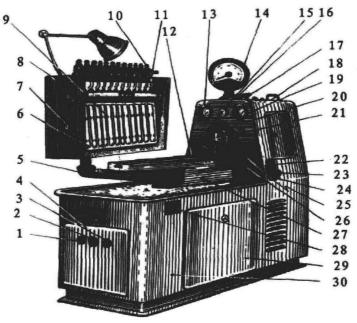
12PSD55 Injection Pump Test-bed External Structure Drawing
